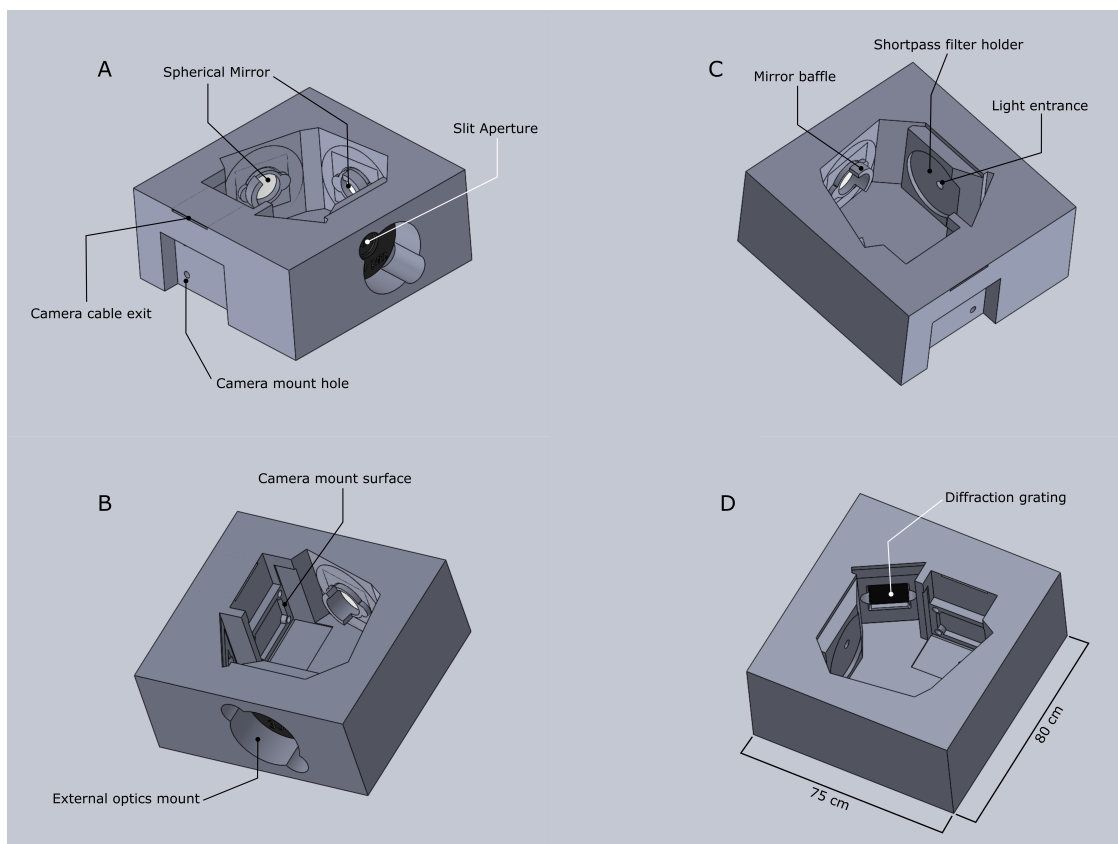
3D models of the PiSpec taken from the SolidWorks<sup>®</sup> design. The vertical profile here has been slightly cropped, for improved visibility of the PiSpec interior and its components.
